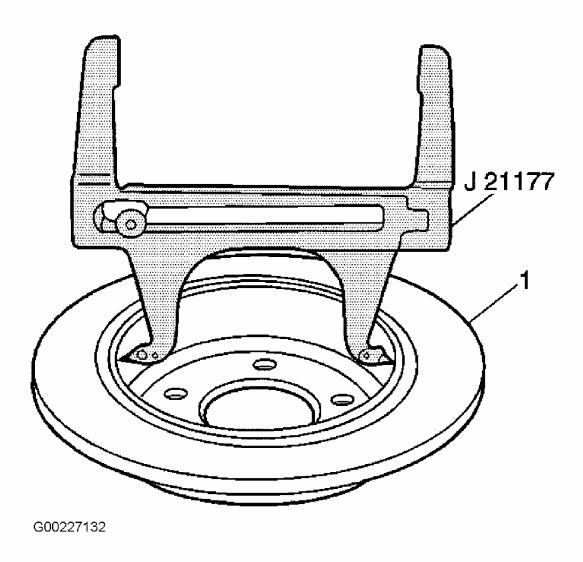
Measuring Rotor Inner Park Brake Diameter Courtesy of GENERAL MOTORS CORP.
